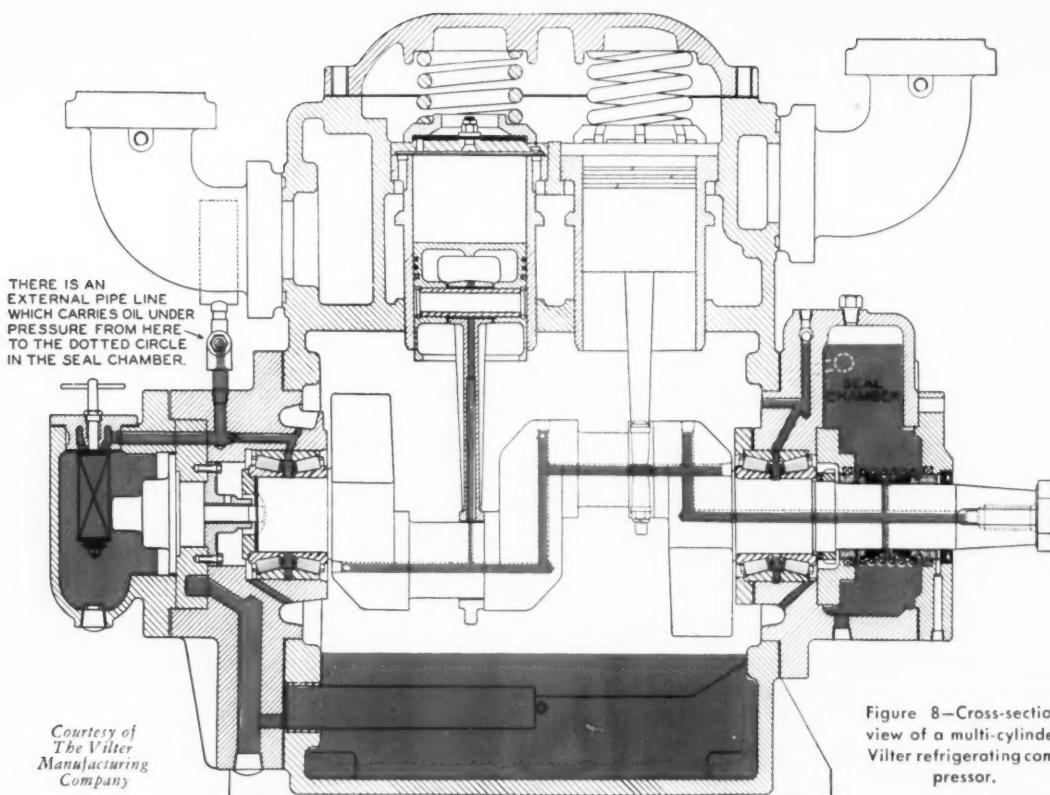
Cross-section view of a multi-cylinder Vilter refrigerating compressor.
